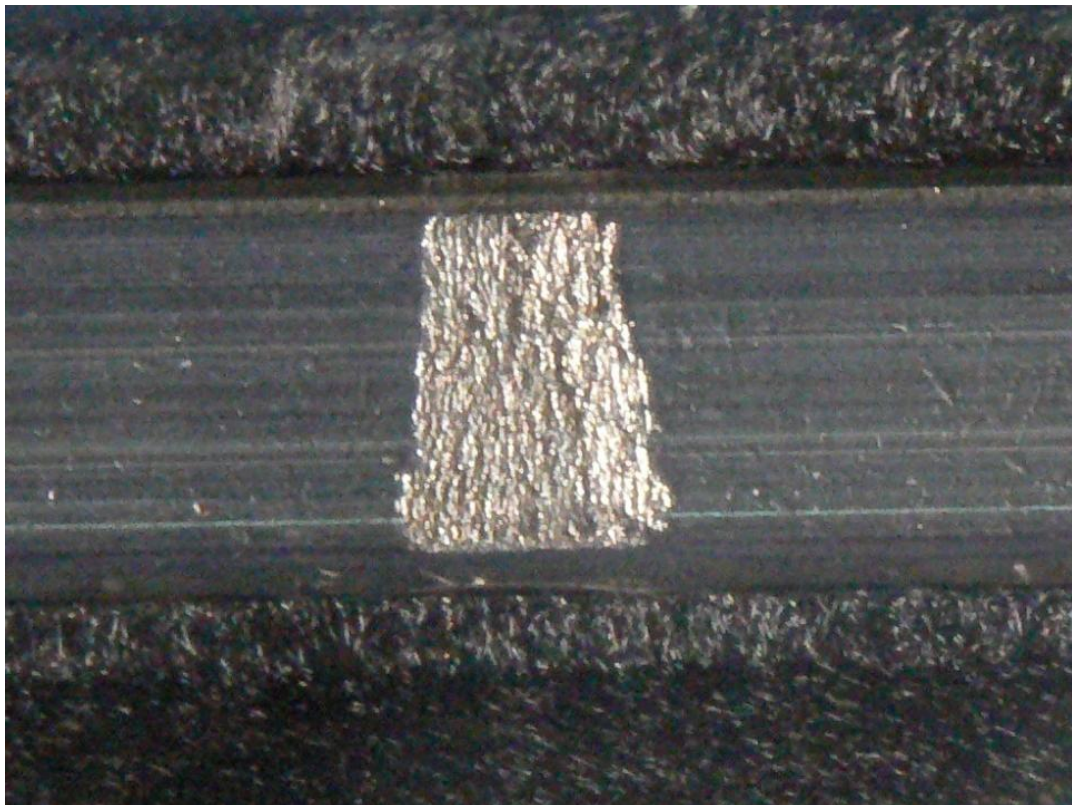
Spalling of carriage raceway surface (1878 km 11 kN)
